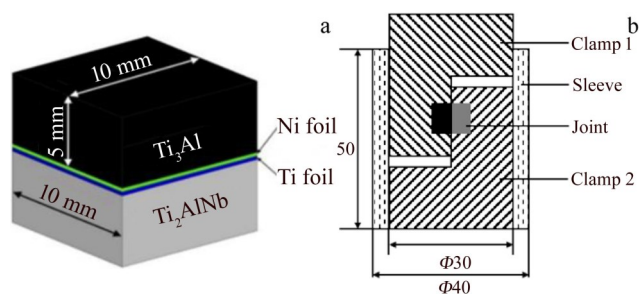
Diagram of the joint assembly (a) and device for shear testing (b)
